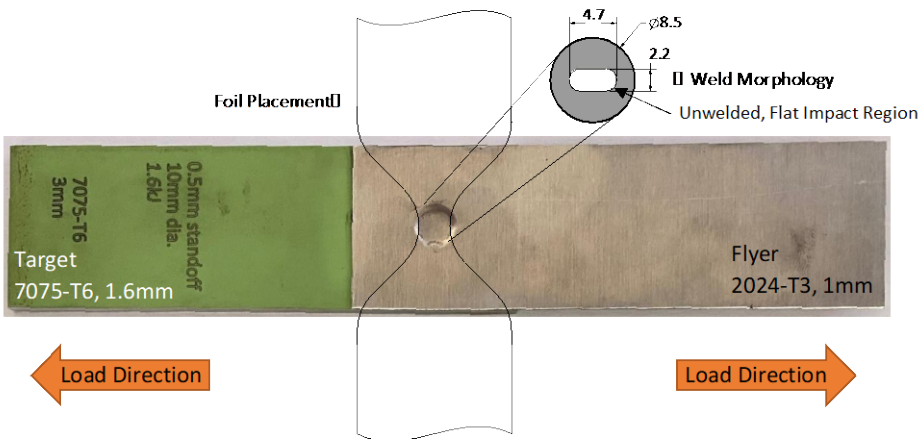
An example weld is shown with the foil orientation, typical weld morphology, and standard tensile test loading direction indicated. A dimple is left in the flyer sheet at the weld site. This dimple takes on the approximate shape of the machined standoff cut in the target sheet.
